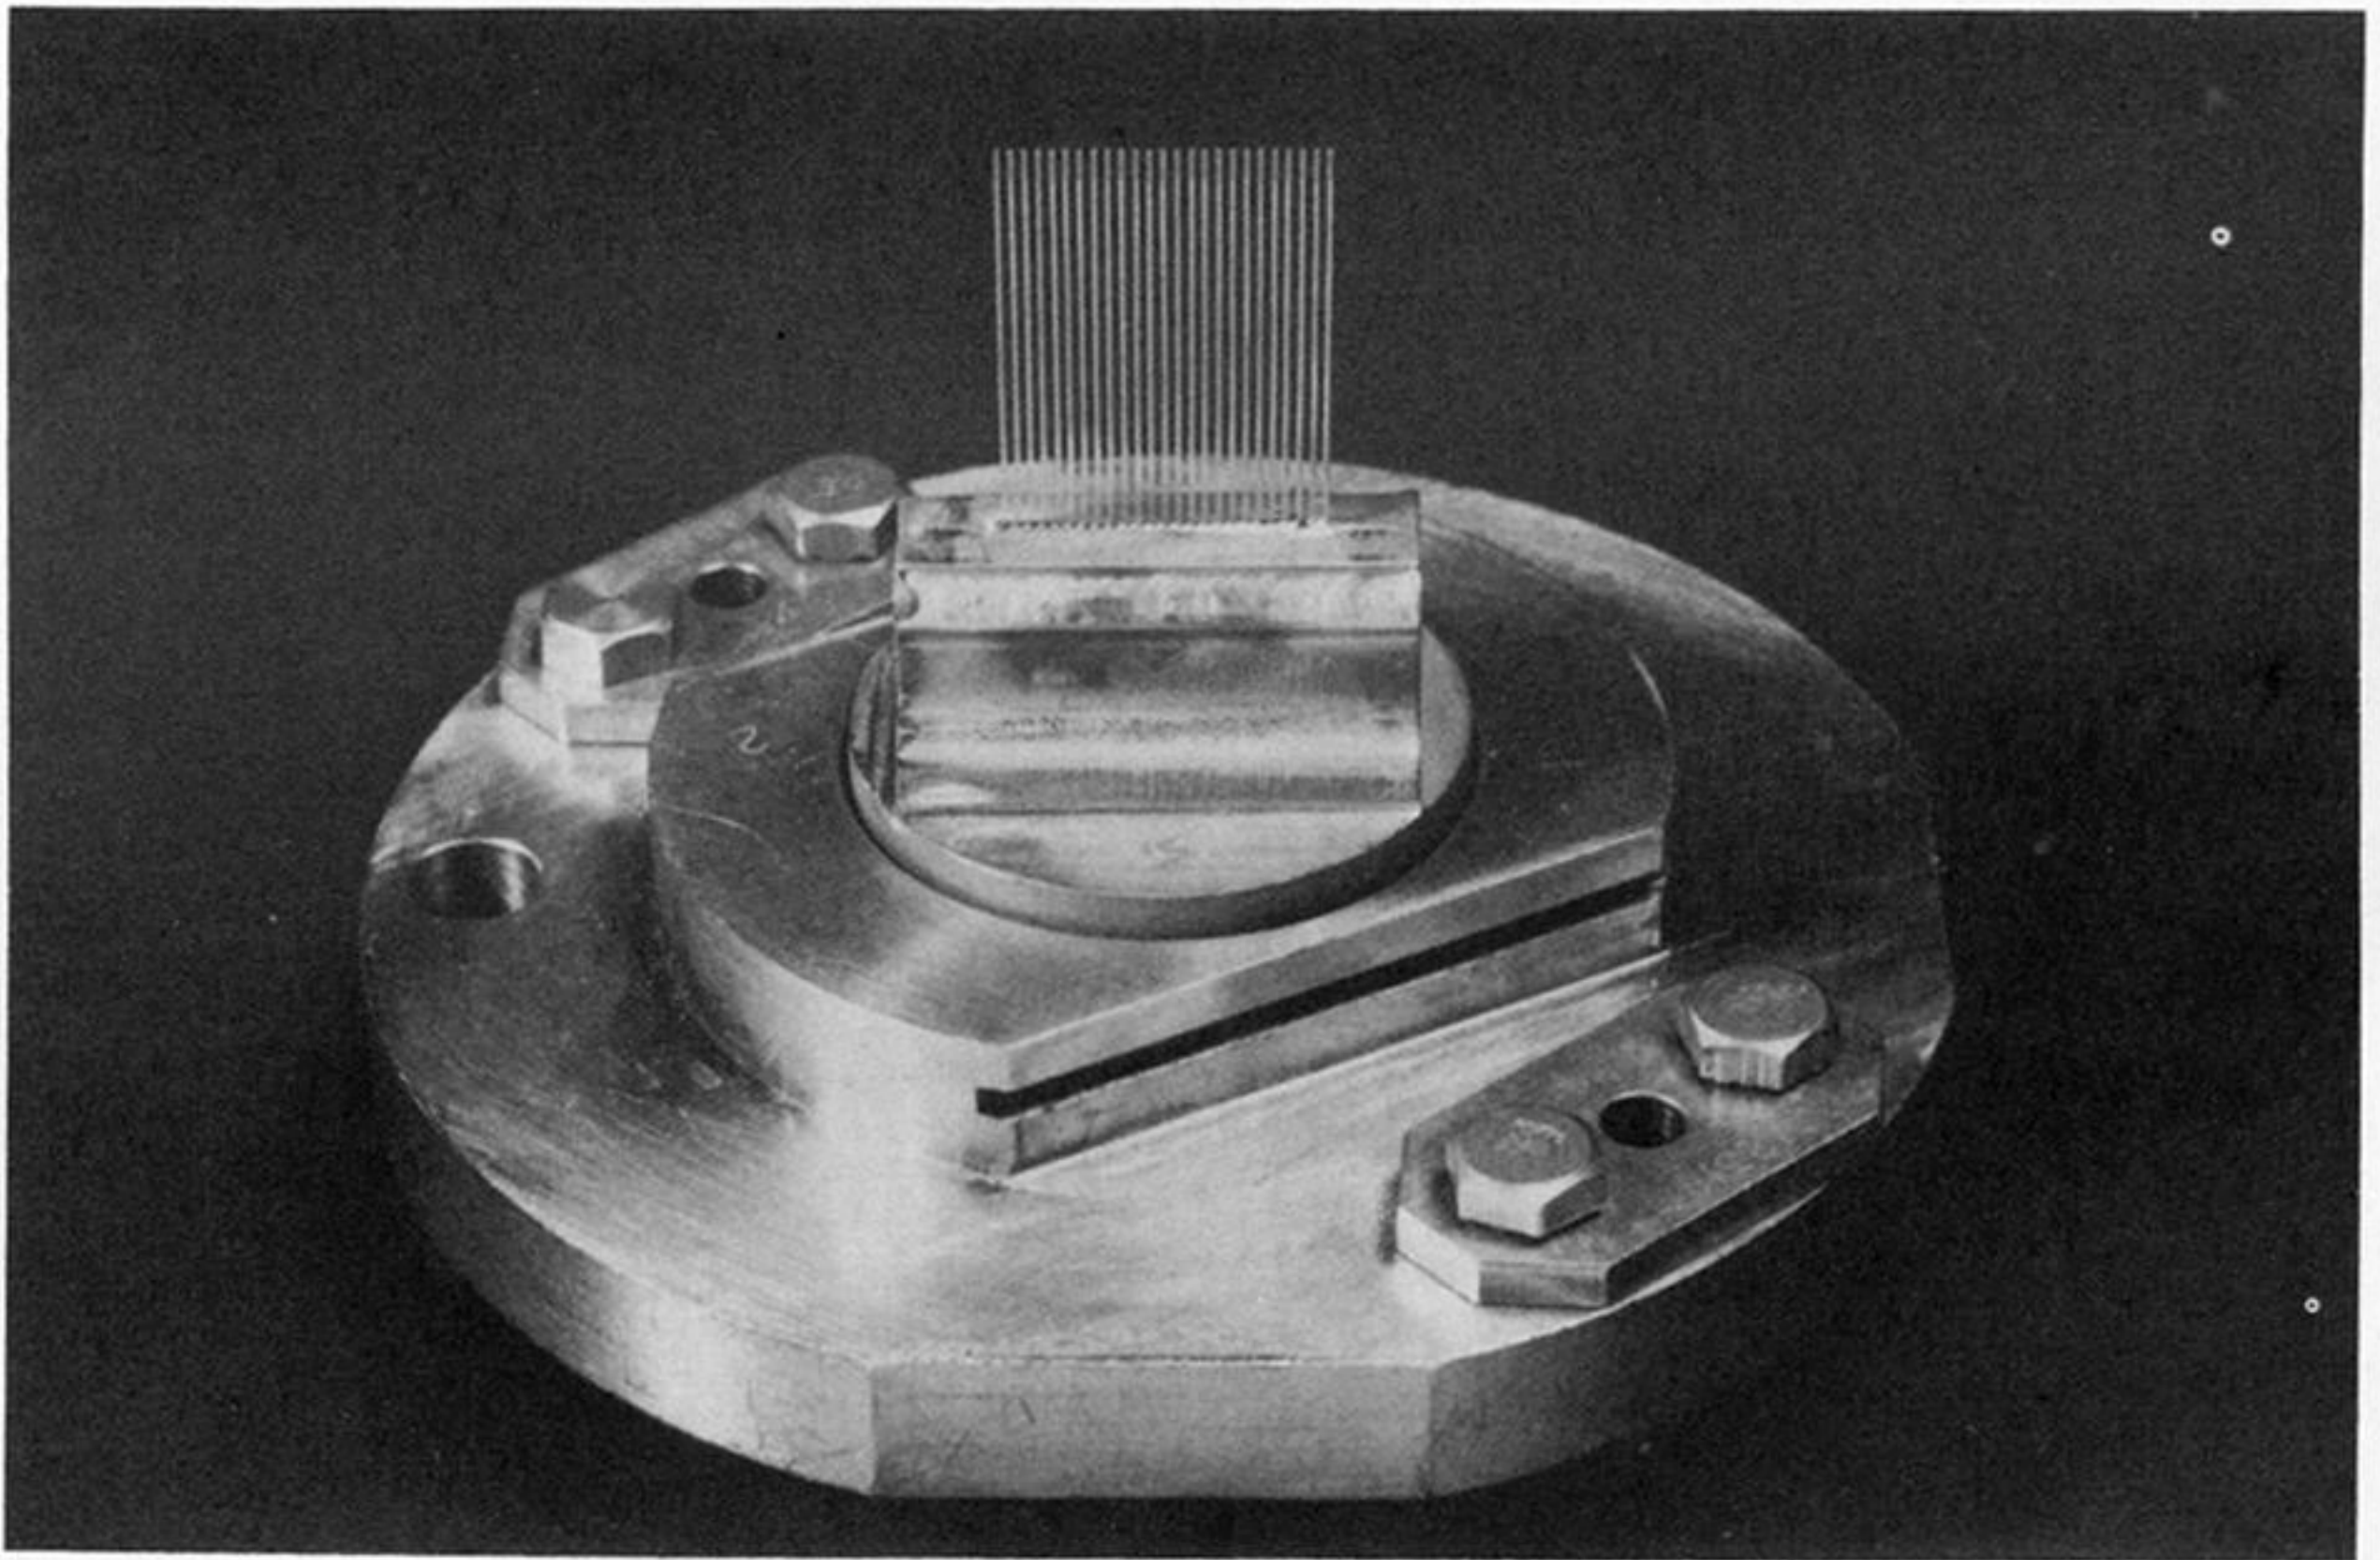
Multiple glass capillary fixture for drilling small holes. (Courtesy Rolls-Royce Ltd.)
